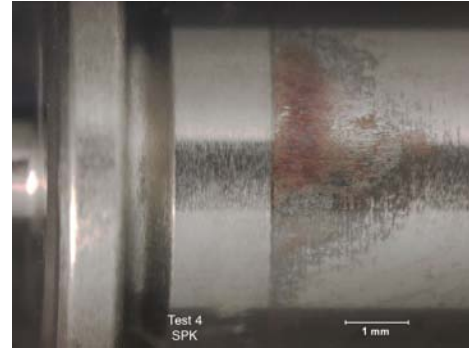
Upper Piston, Injector Hydraulic Coupler, SPK
